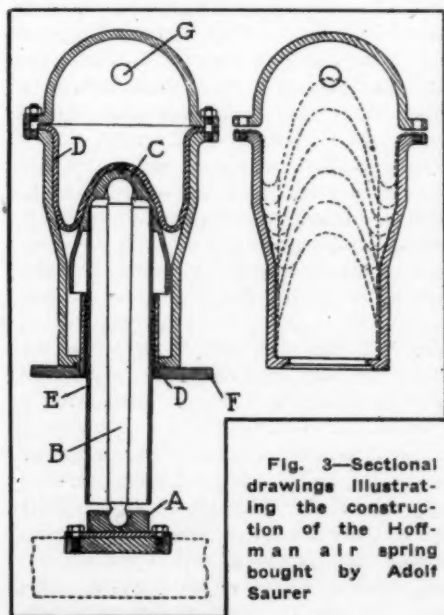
Sectional drawings illustrating the construction of the Hoffman air spring bought by Adolf Saurer
